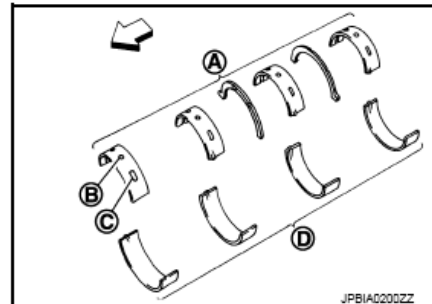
Identifying Main Bearings, Oil Holes And Groove
